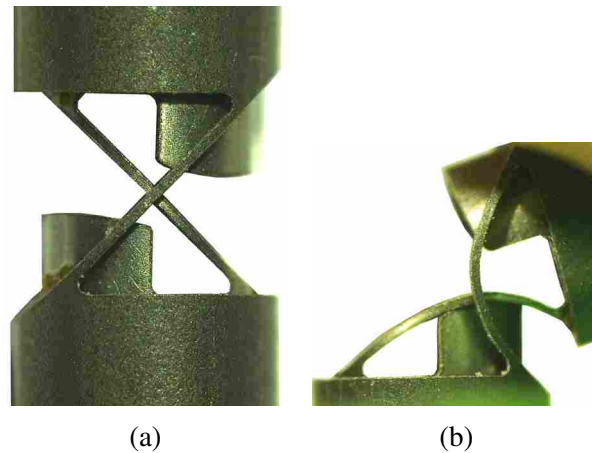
3 mm NiTi CCAFP with cam-surfaces on the inner flexure. (b) shows the inside flexure engaging the cam-surface.
